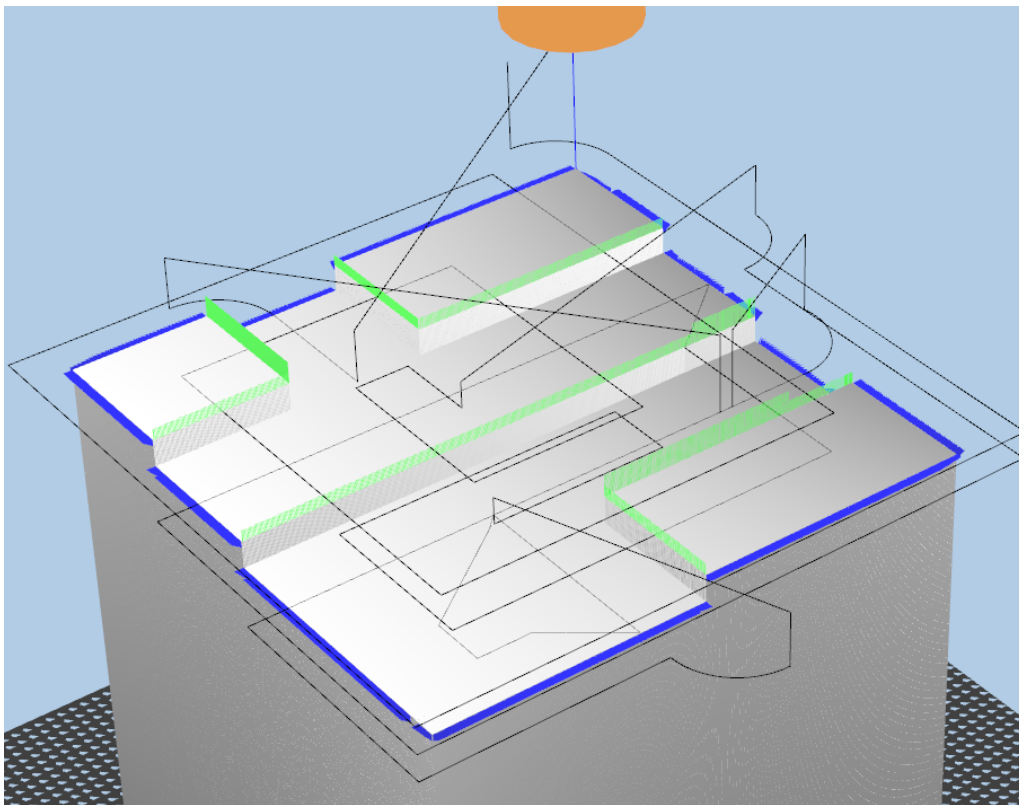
Tool path B in down milling (burr height = 50 μm).
